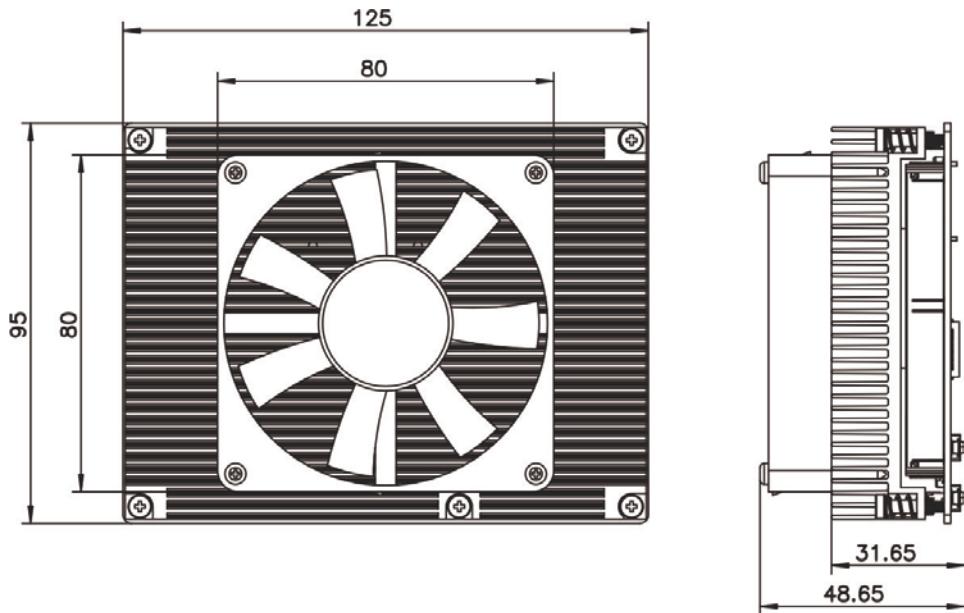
ICE-BDE-T7 Dimensions (with heatsink) (mm)
